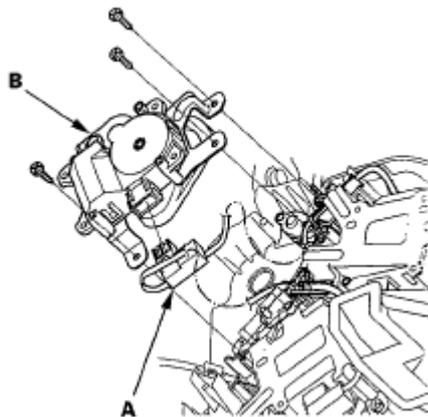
Identifying Driver's Cool Vent Control Motor And Fasteners
